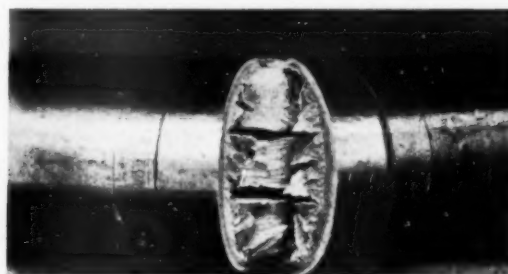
and 2.—Nickel-Chrome Case-hardening Steel Fracture.
